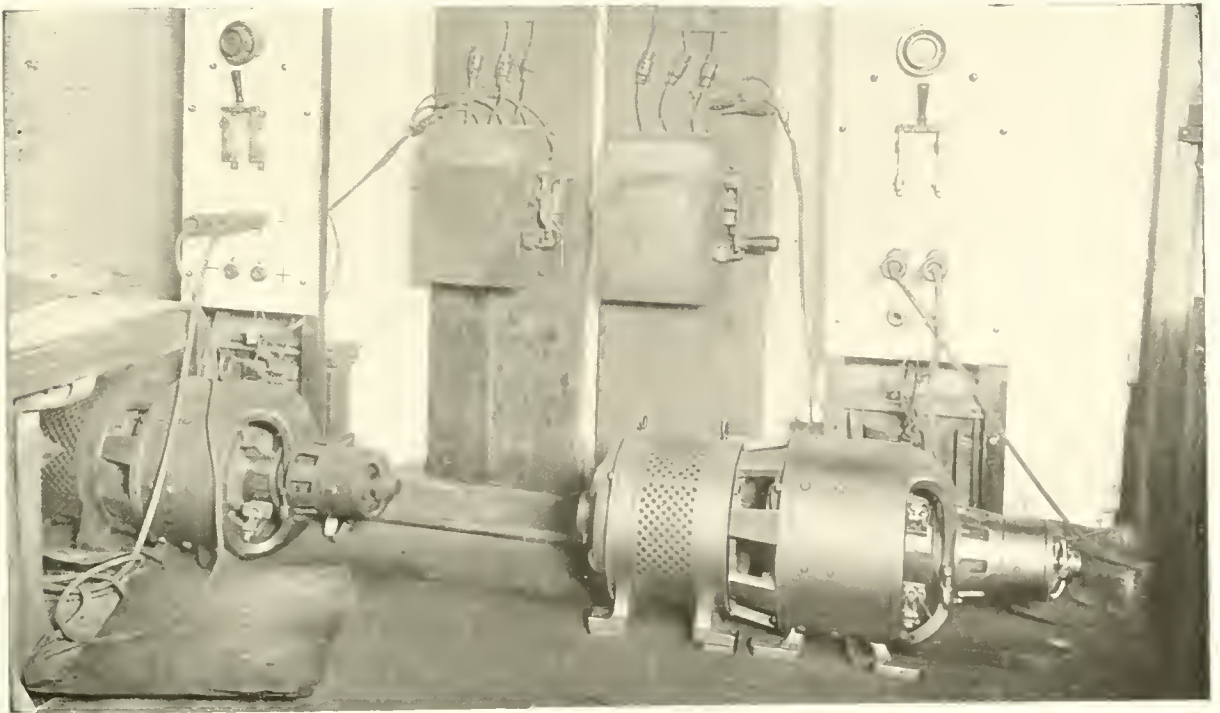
Lincoln Arc Welders in use in large Drop Forging plant
